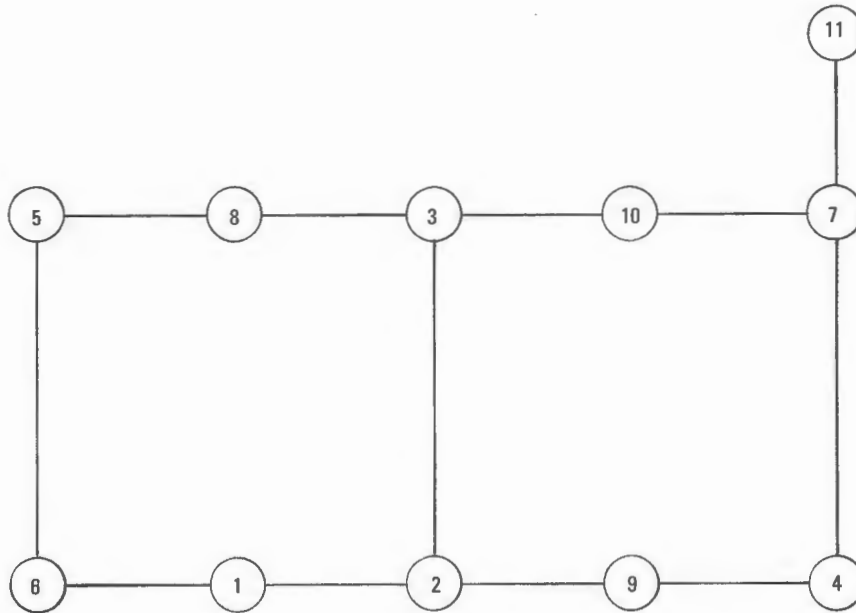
CRANKCASE BOLT TORQUING SEQUENCE
